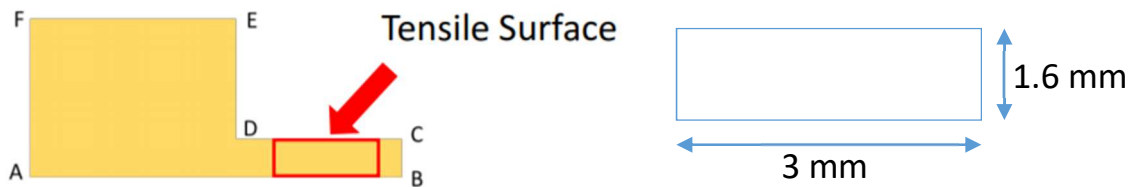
Details of the specimen preparations used for obtaining flexure specimens from the dense 38% MMA components. Left - geometry of a dense 38% MMA component as-manufactured with markings to indicate where samples were removed. Right – final geometry of the specimen.
